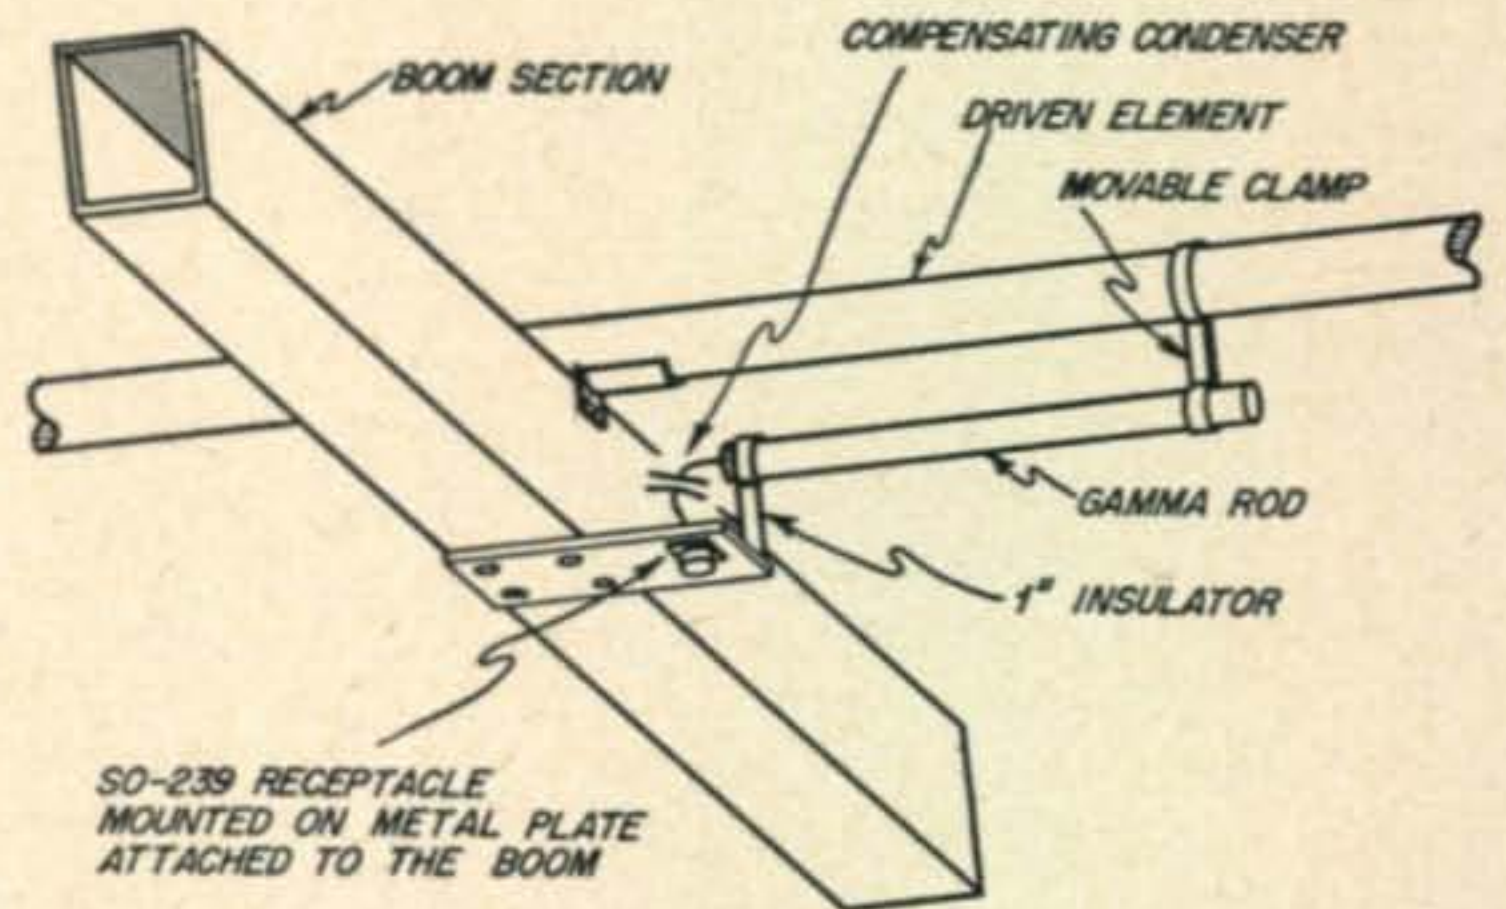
Suggested method of mounting the compensating condenser and gamma rod.
